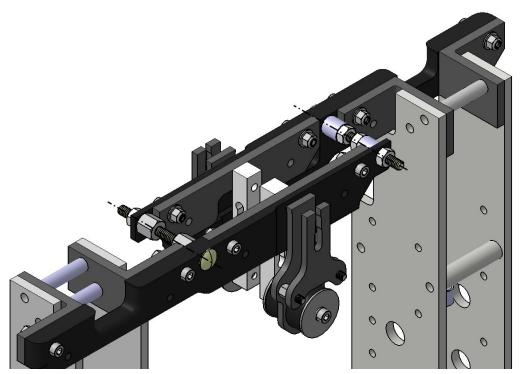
Cut view of two bolts connecting two load measurement units (using two methods)
